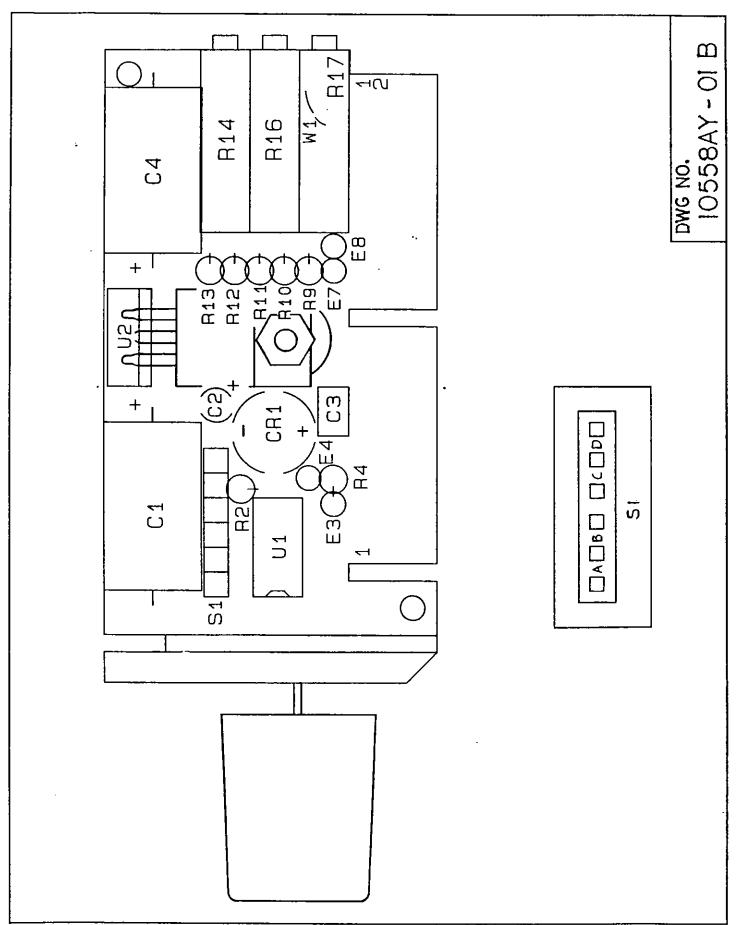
Plug-in Card Assembly -E or -P Diagram
